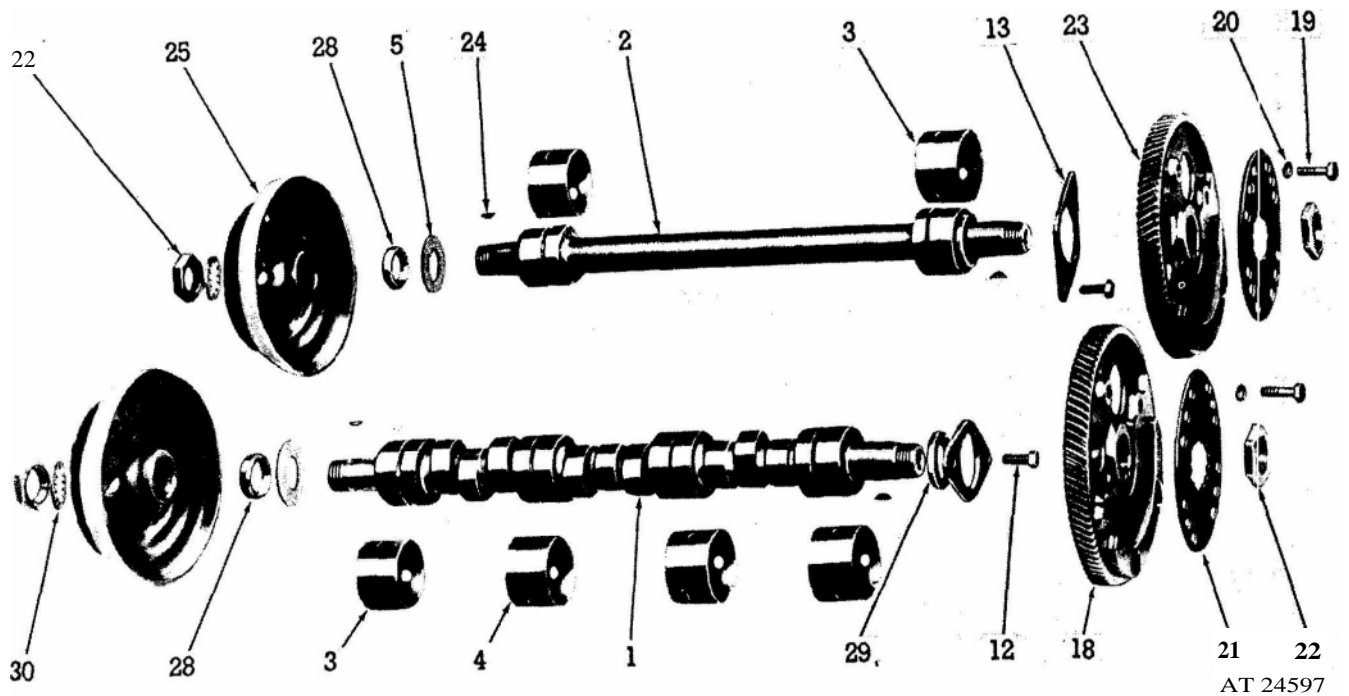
Removing and replacing camshaft or *balance* shaft bearings.
